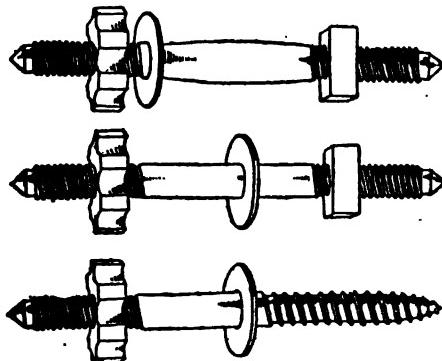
Hand-Rail Screws or Joint-Bolts.
